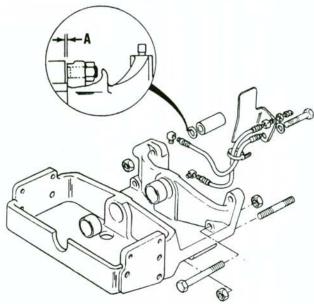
Measure gap (A) between the top spacer tube on right side and front support of 340-360 models.
